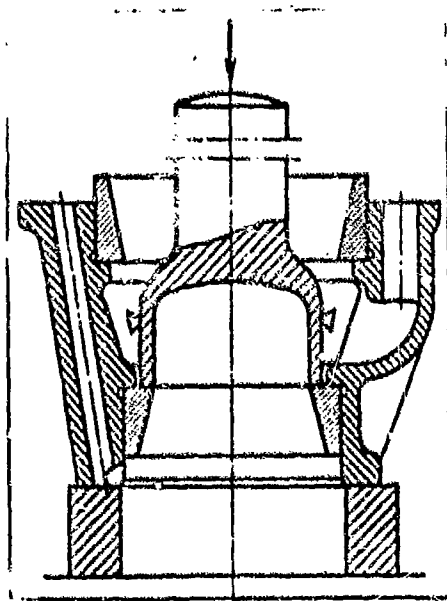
Pressing the outer bearing race from the bevel pinion gear carrier
